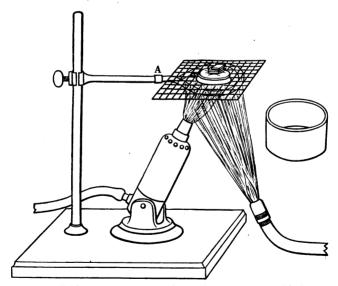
Soldering apparatus: Adjustable gas-burner, soldering frame and support, with investment in position, with the flame properly applied. The ring for confining the flame is placed on the wire frame around the investment and another wire frame on top of the ring.
